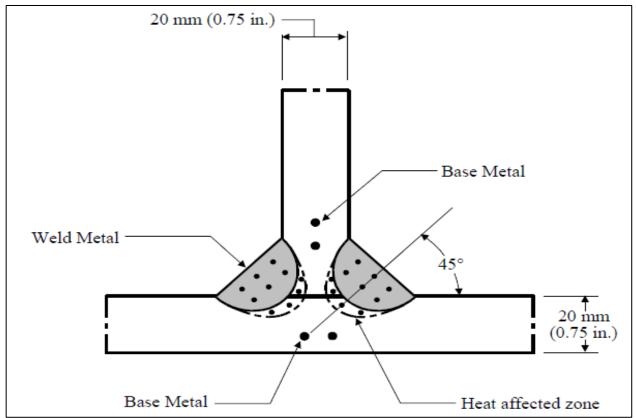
Fillet Weld Hardness Test Locations
